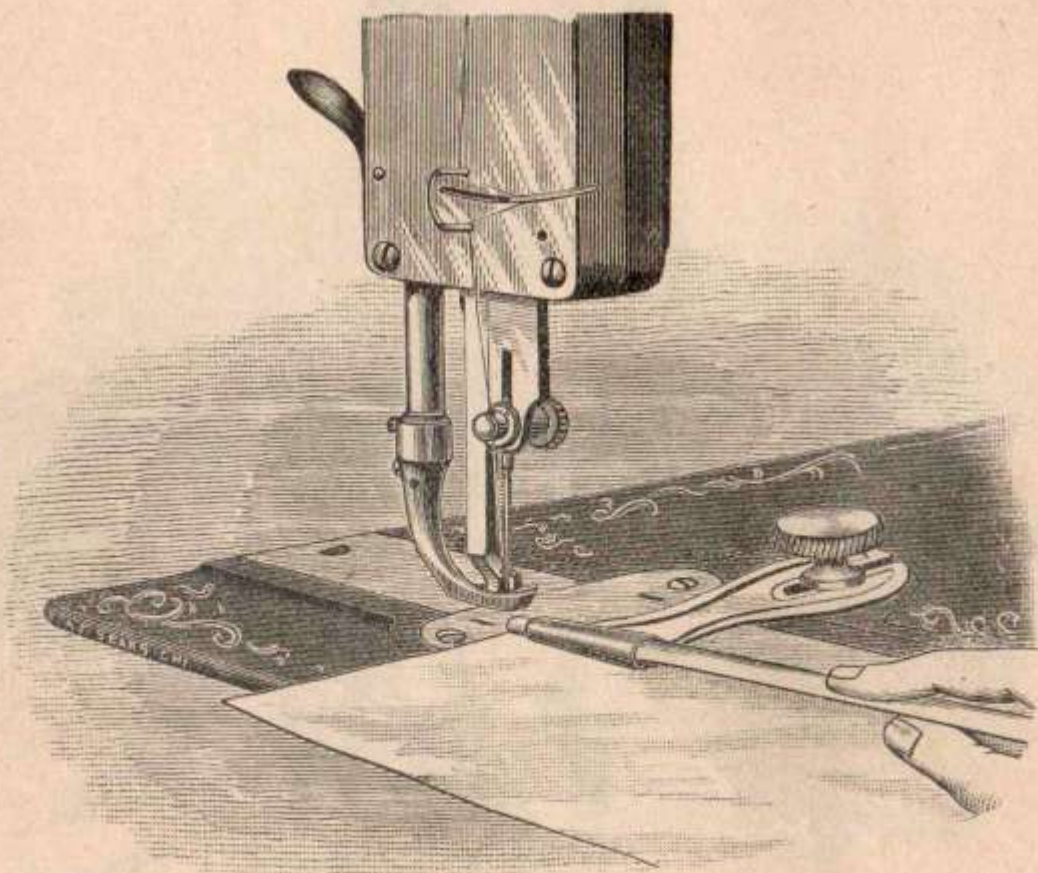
shows the operation of sewing a curved piece on a straight one, without basting; using for that purpose the Gauge and Self-Sewer.
